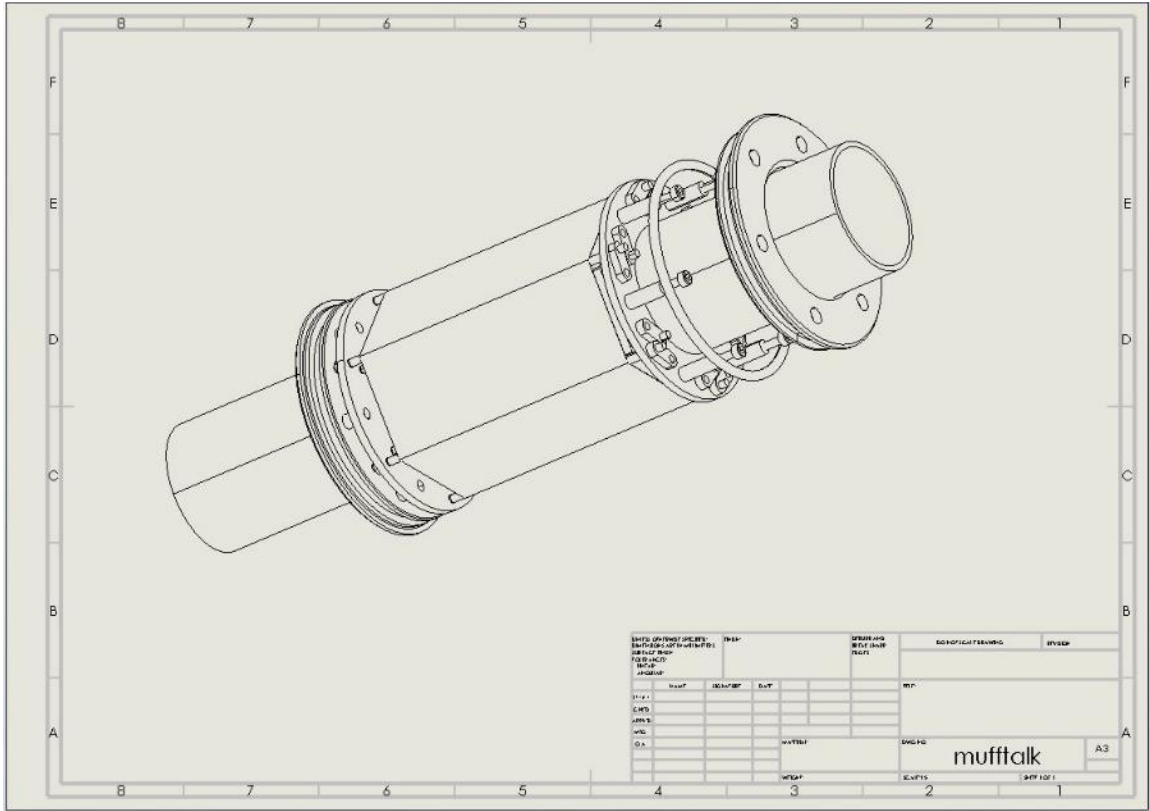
3D assembly drawing of second coaxial CNT speaker prototype
